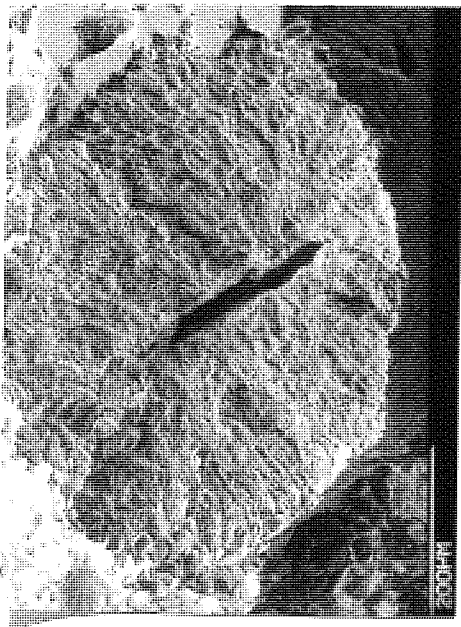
Example of "fisheye" fracture . Steel M rolled at 1100°C and tested transversely .
